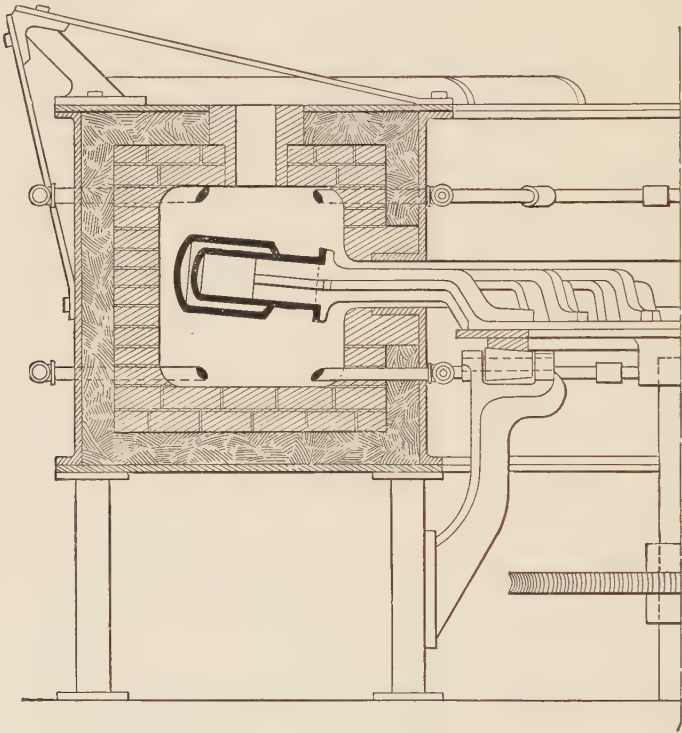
Furnace with rotating conveyor for annealing cylinders of automobile engines.
